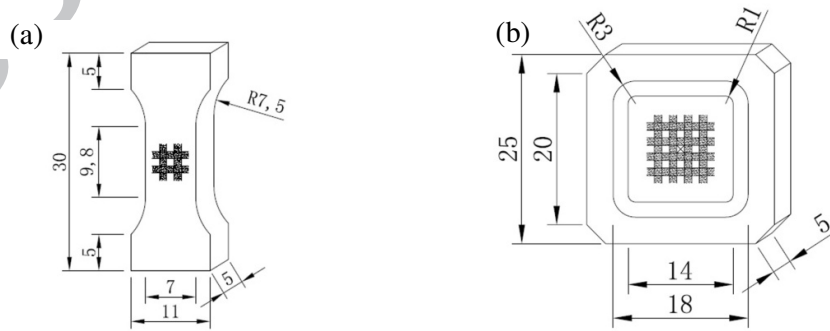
Shape and dimensions of the test specimens: (a) uniaxial compression specimen;
